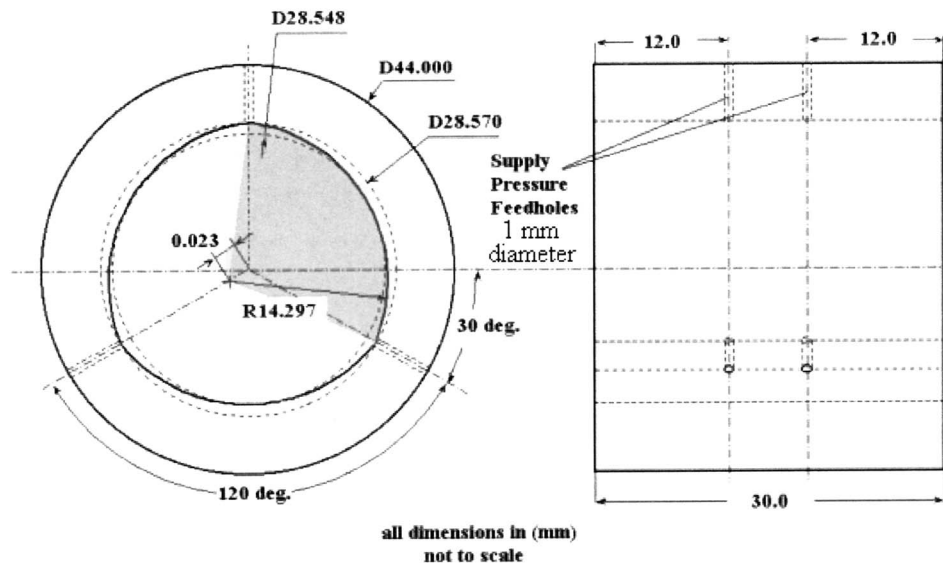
Geometry of the three lobe test bearing showing preload and feedholes
